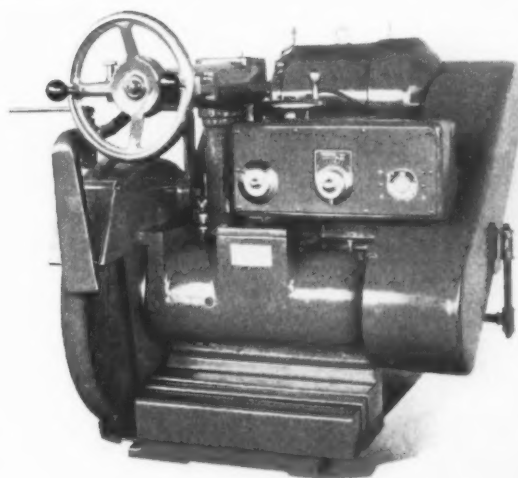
Head End of Lanhydro Turning Machine, Showing Hydraulic Equipment
